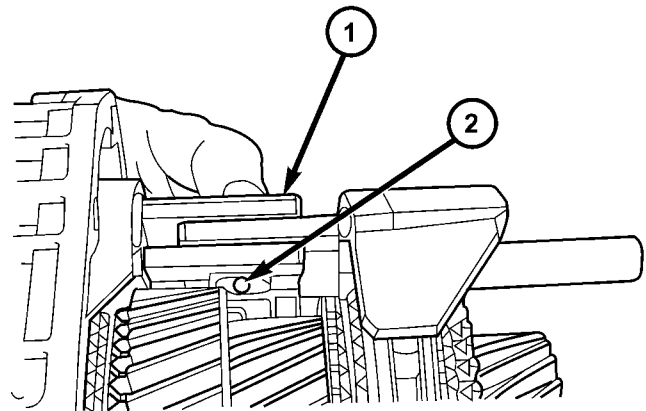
SEATING SHIFT SOCKET ROLL PIN
